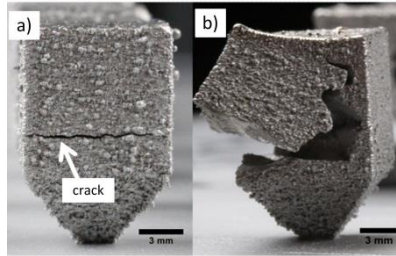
Examples for crack incidence: a) crack propagating through a part; b) bursting specimen manufactured without base plate heating and low energy density input
